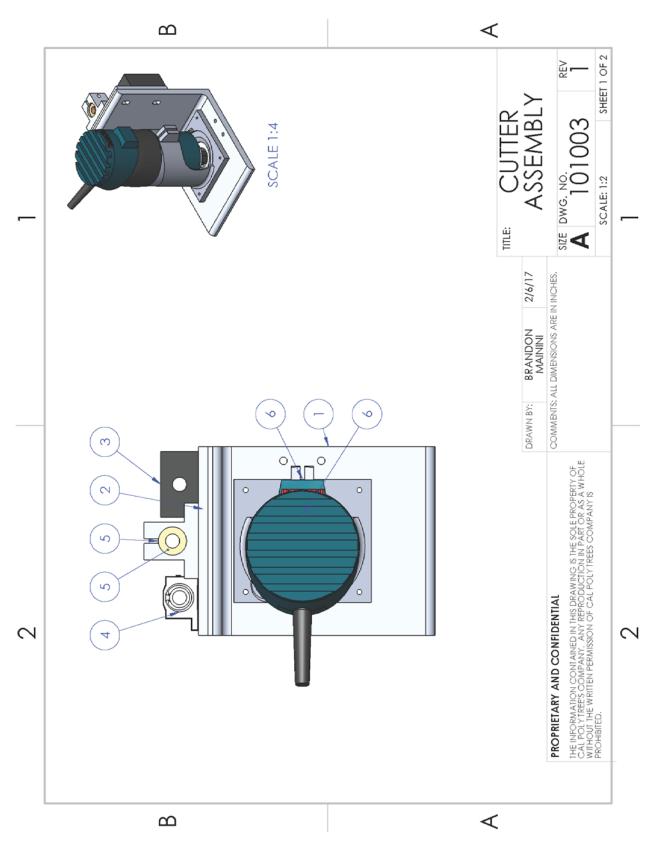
Cutter Assembly Detail Drawing (Page 1 of 2)
